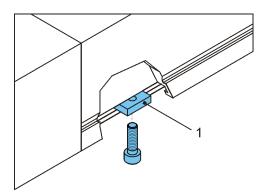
Sliding blocks (1) in the groove on the underside of the basic profile
